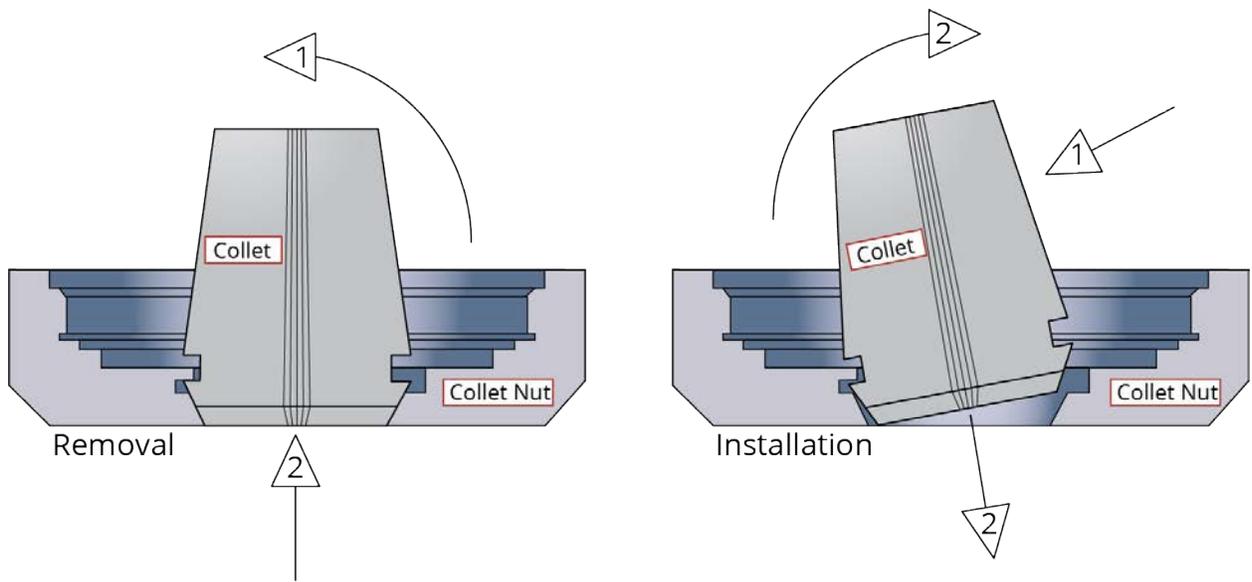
Schematic of Collet Insertion Into and Removal From Collet Nut
